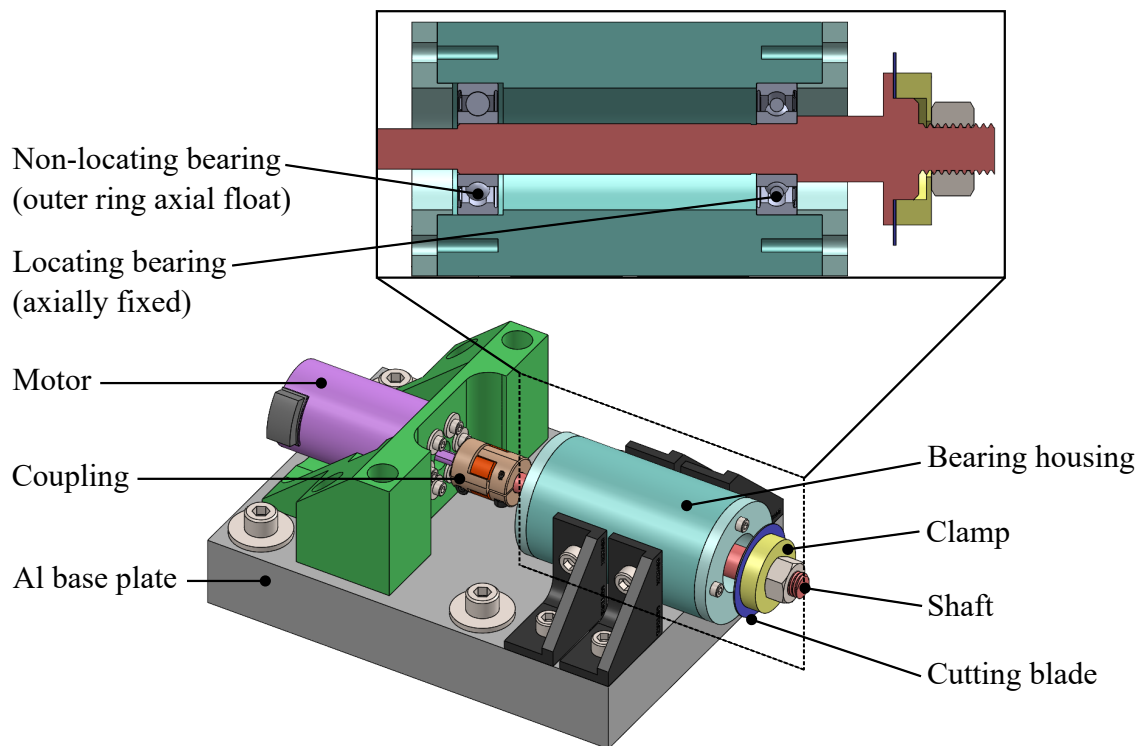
Mechanical layout of the high-speed rotation test setup used in Challenge 1. A brushless DC motor drives a stainless steel shaft via a flexible jaw coupling; the shaft is supported by two deep-groove ball bearings in a rigid cylindrical housing mounted to an aluminium base plate. The inset section view highlights the locating/non-locating bearing concept (axial constraint by one bearing and axial float by the other) and the blade clamp arrangement, with the blade positioned close to the outboard bearing to minimise unsupported overhang.
